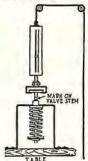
When the engine is over-hauled, the old valve-springs can be tested to see that they have not weakened, and whenever a new spring is put in, it can also be tested. The illustration shows a simple means of determining whether a spring is in good condition or not.
